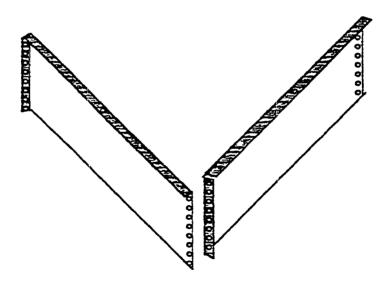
Orientation Of Panels For Assembly Outer Ring.
